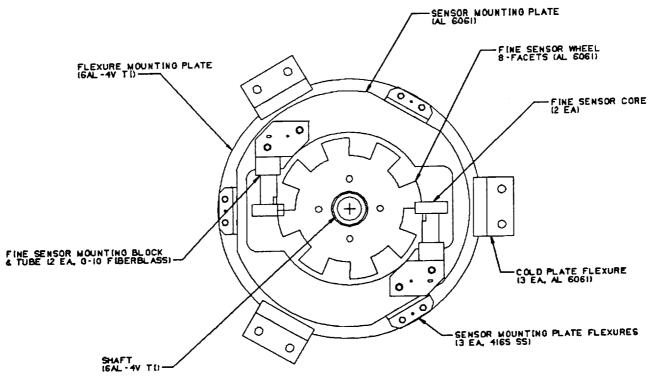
Top-end view of the IRS mechanism fine position configuration (grating durm not shown).
